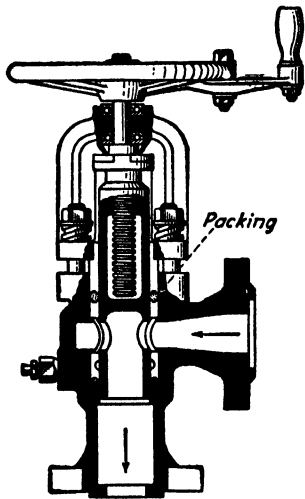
Seatless valve with nonrising stem and inside thread. (Courtesy of Yarnall-Waring Co.)
